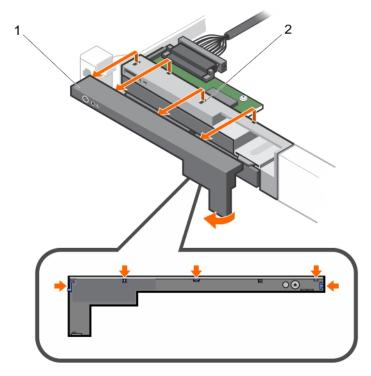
Removing the control panel—eight 2.5-inch hard drive chassis
